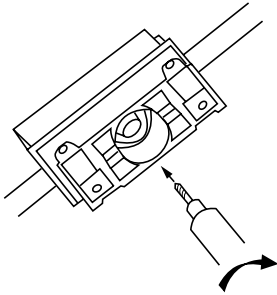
(13) Mounting the Core Probe for Coaxial Cable
